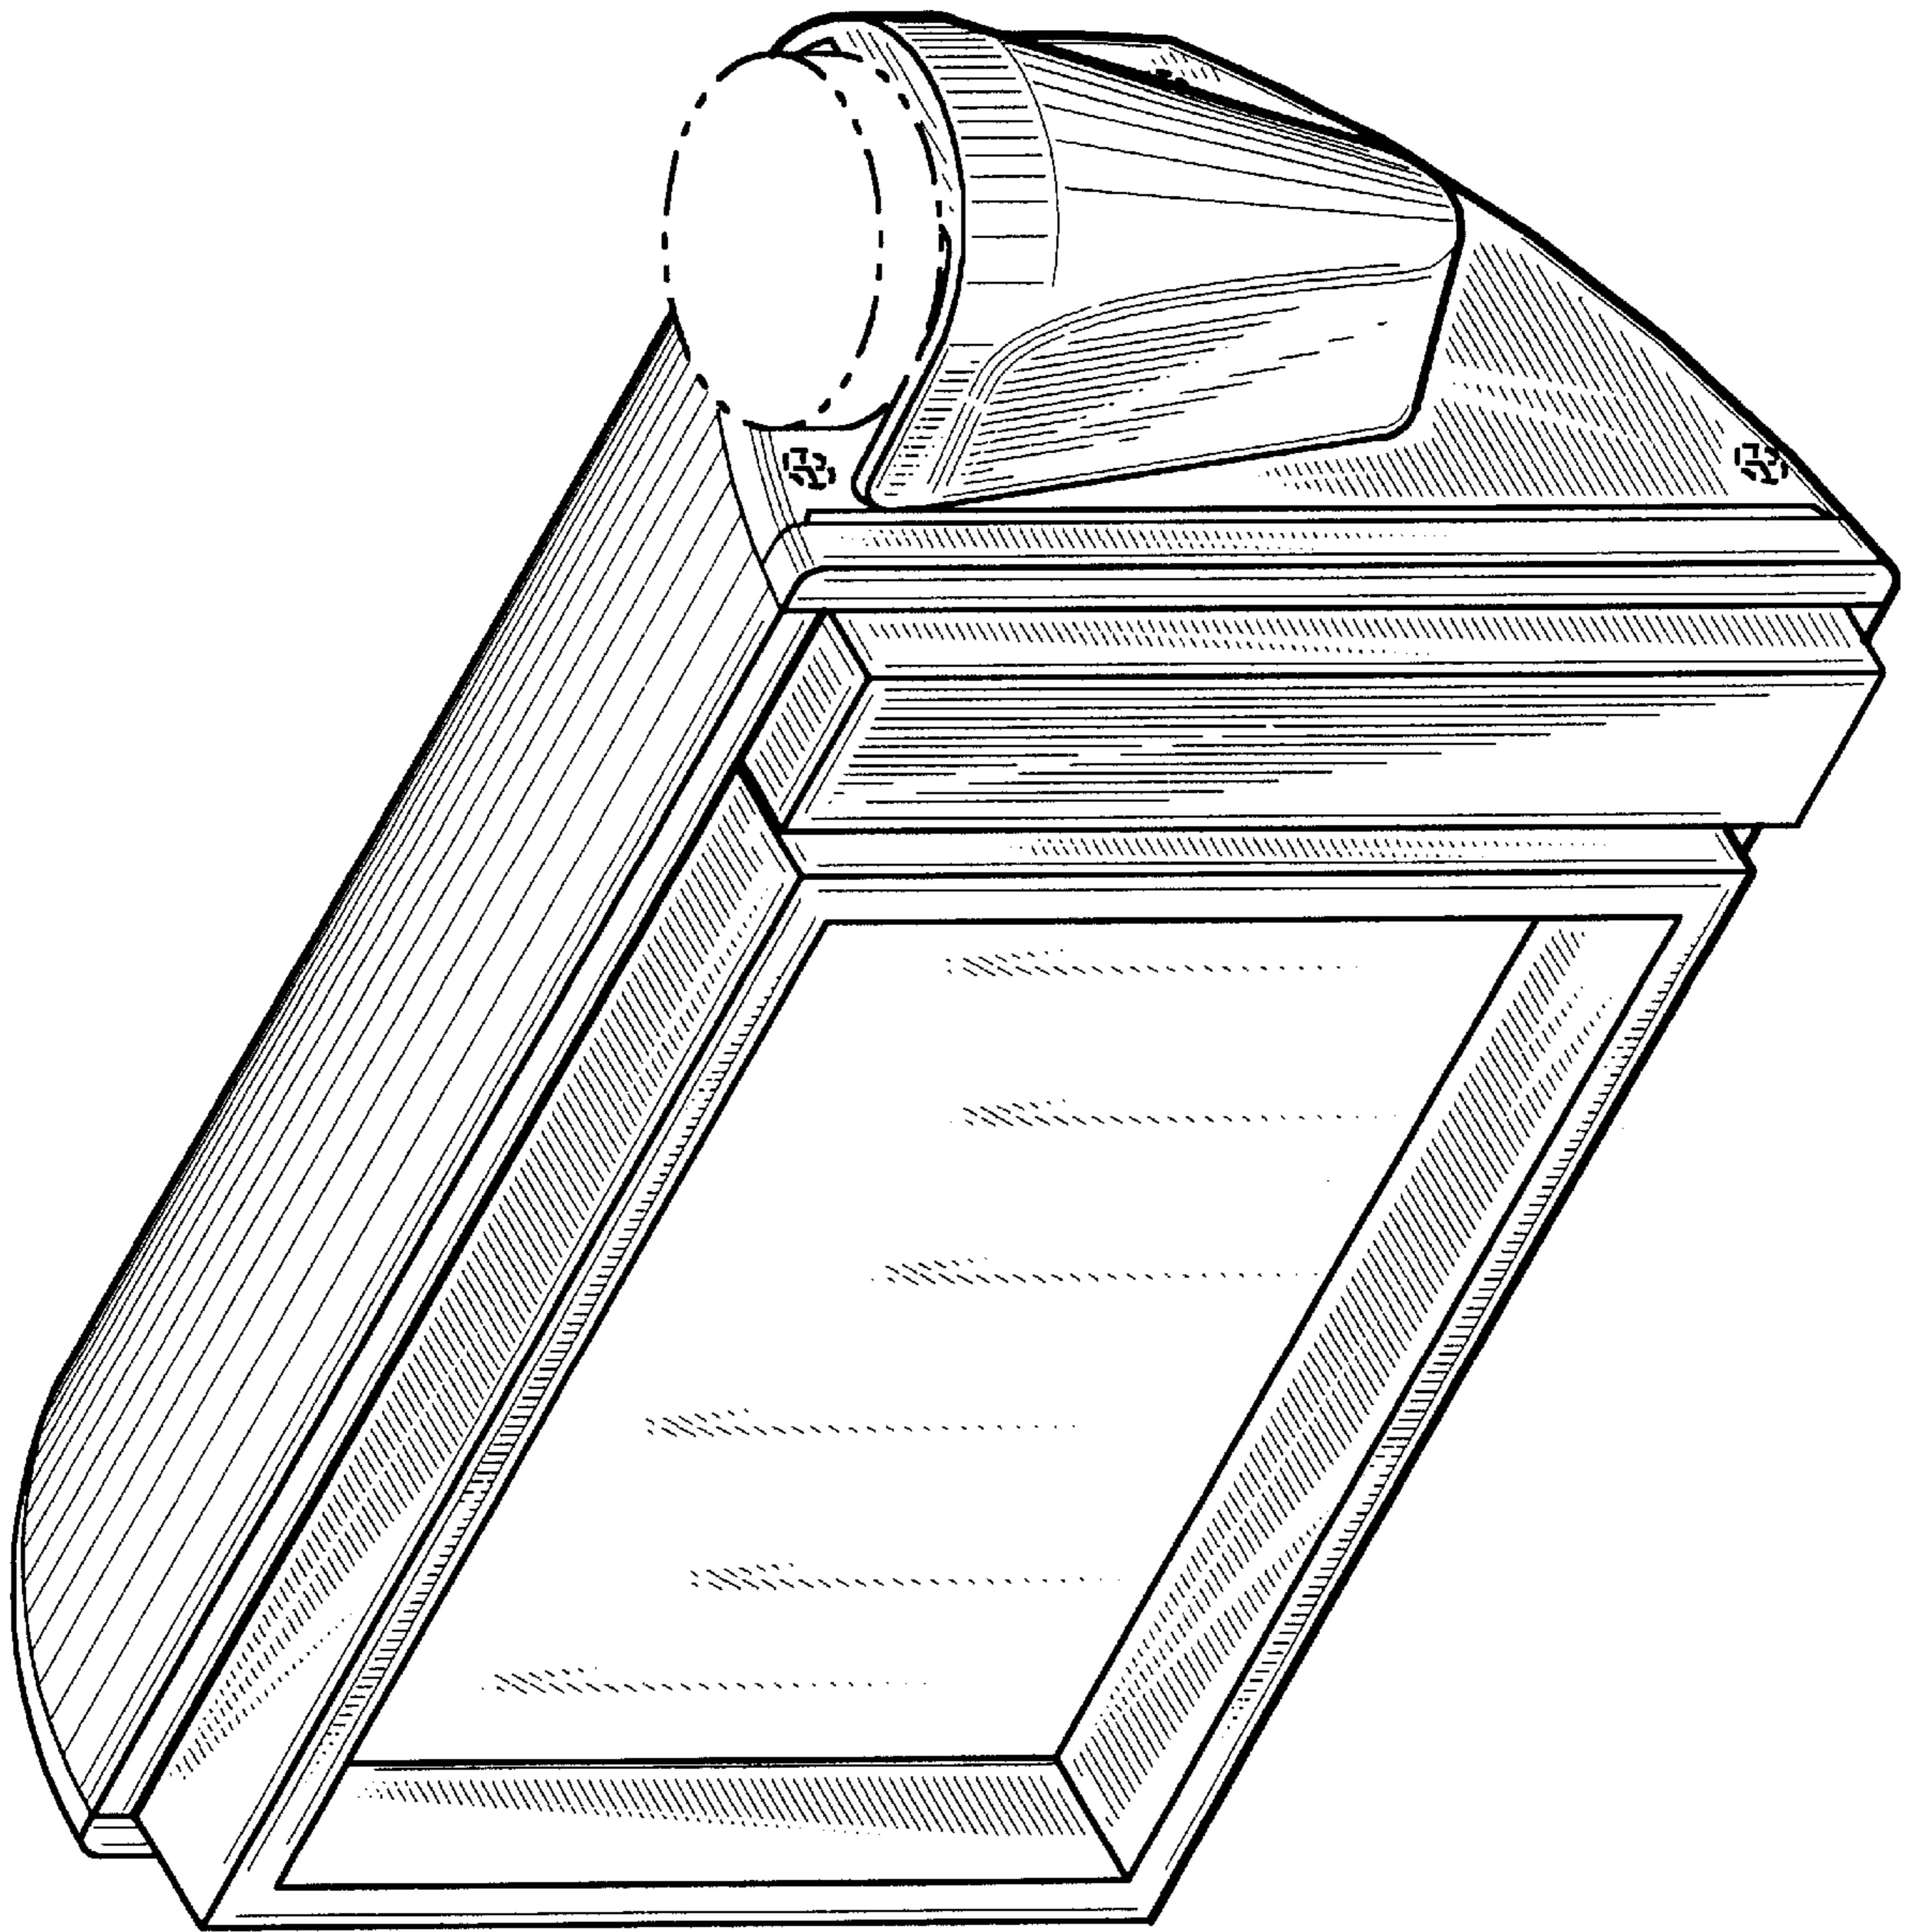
is a bottom view of the lighting fixture shown in FIG. 1.
